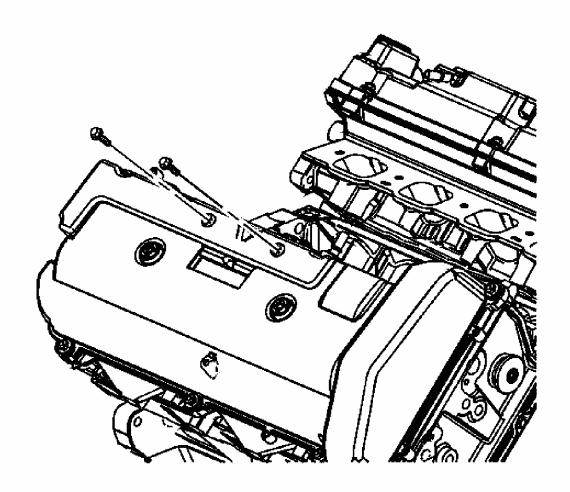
Identifying Fuel Injector Sight Shield Bracket Courtesy of GENERAL MOTORS CORP.
